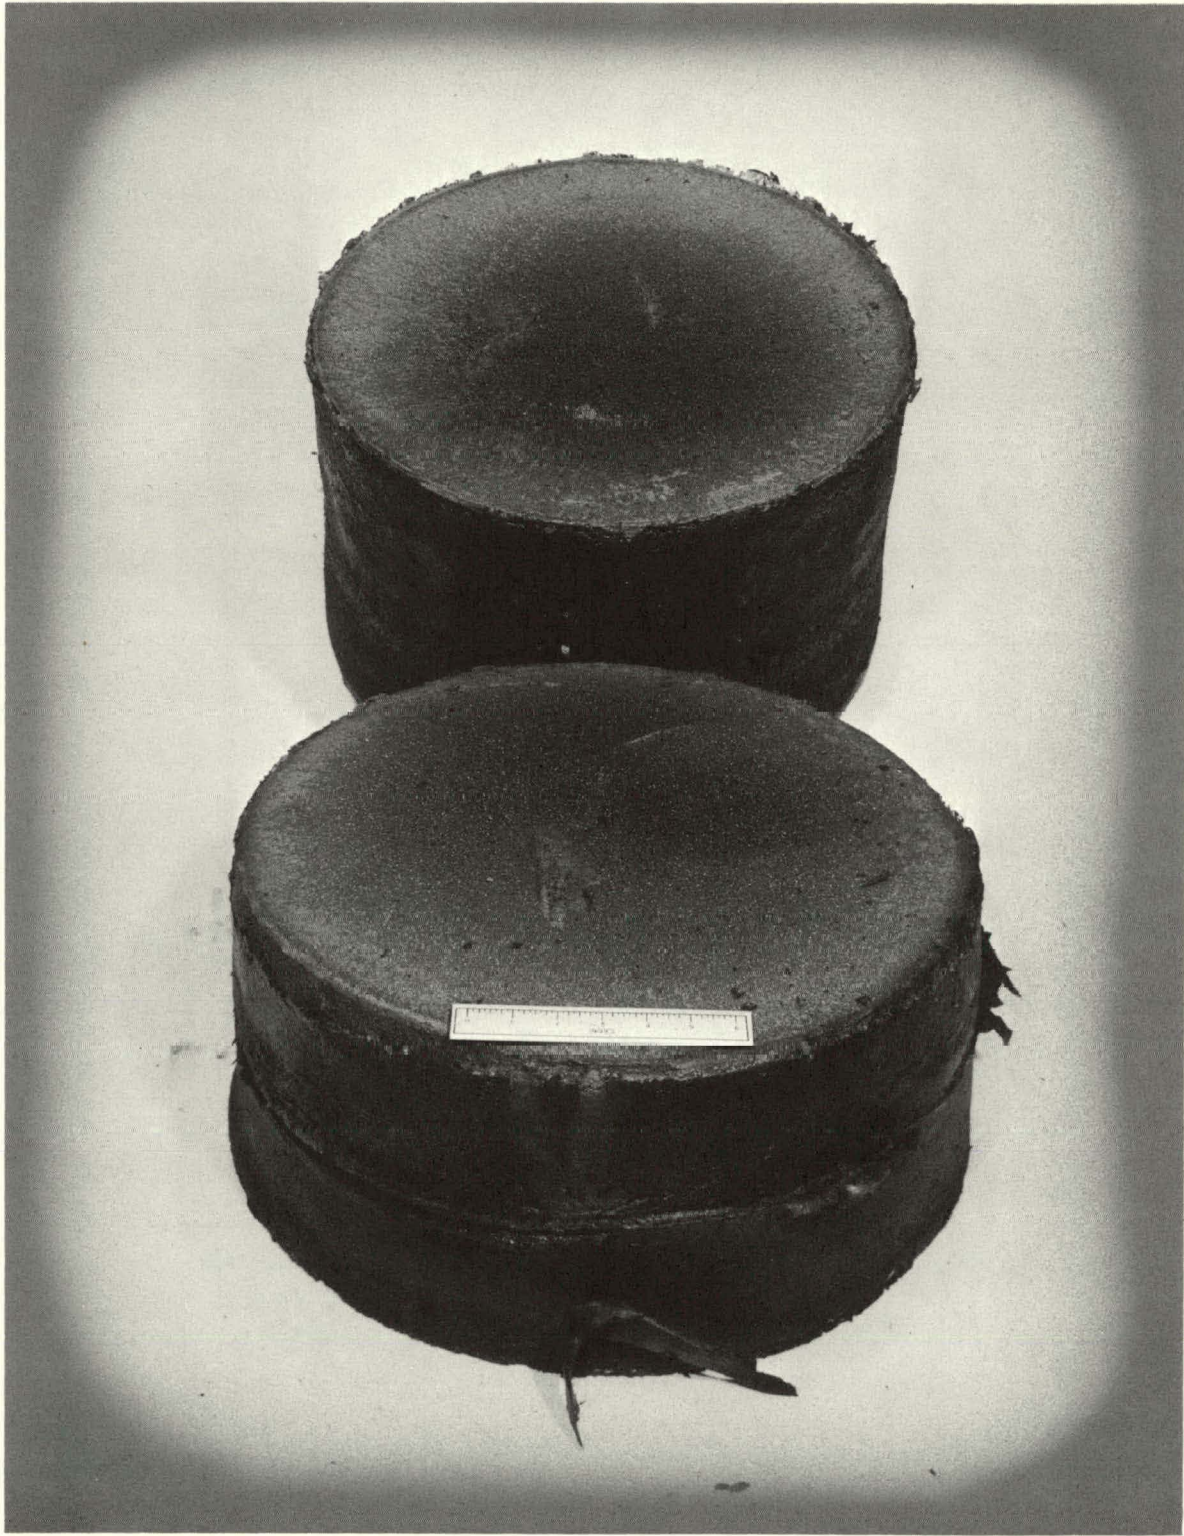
CROSS-FRACTURED GREEN CASTING. (Elevation View)
